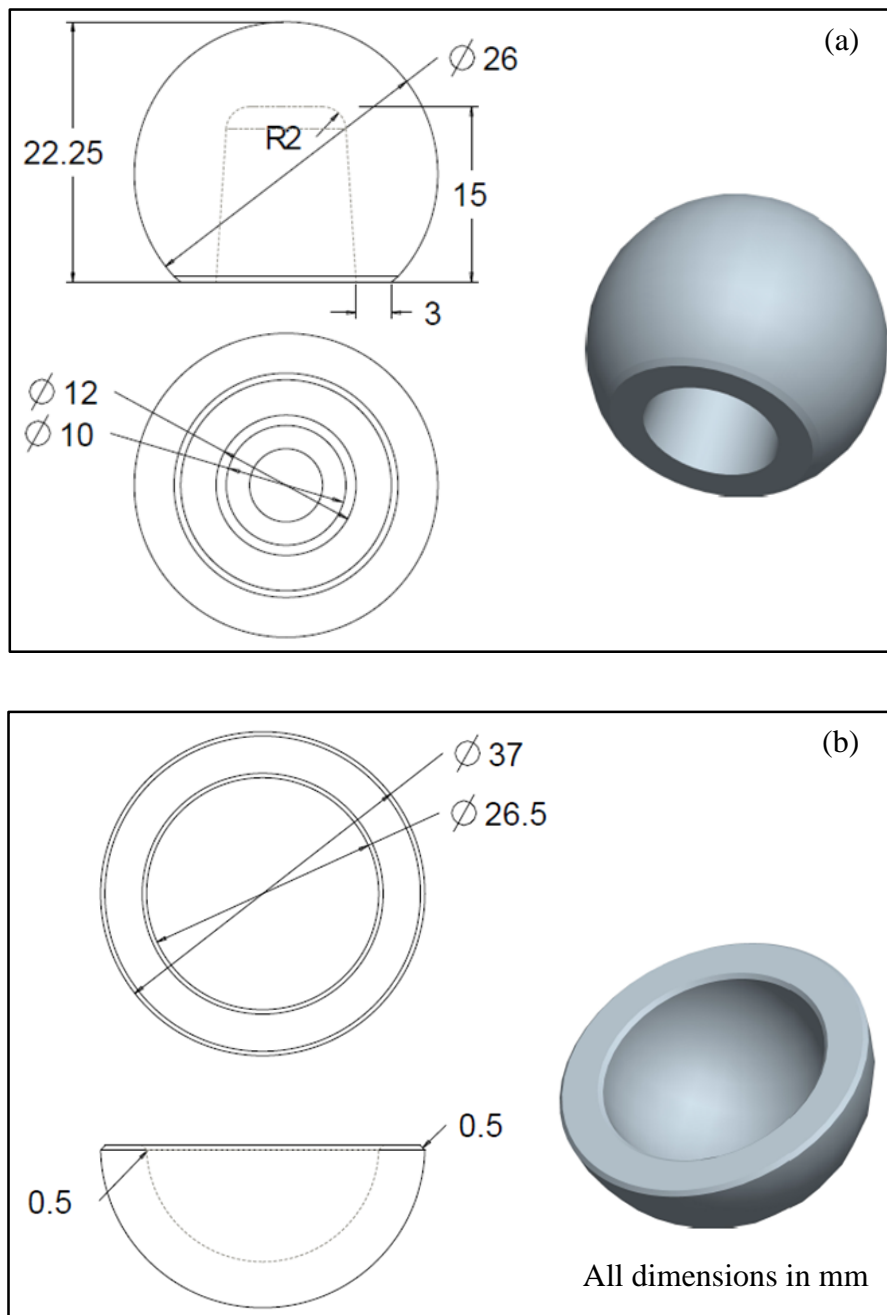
Computer aided design (CAD) originated orthographic and isometric projection of targeted 26mm ZTA femoral head (OD) with consist of tapered cylindrical blind hole and fillet curvature (a) and 26.5mm inner diameter (ID) acetabular socket (b).
